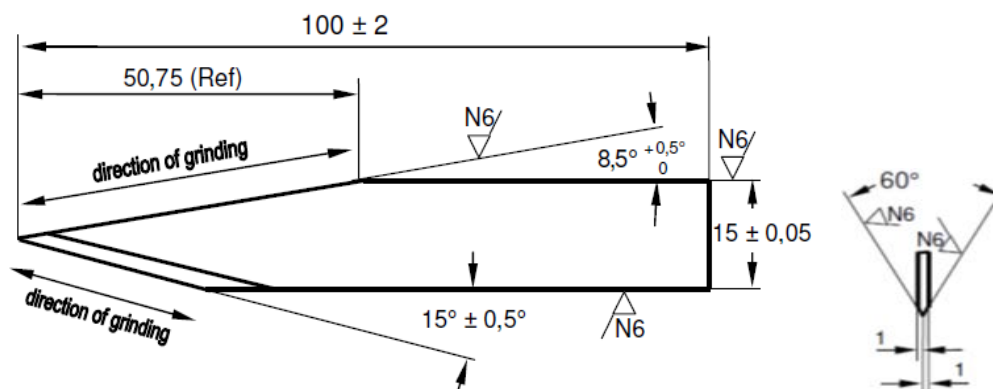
Geometry of the test blade P1/B (dimensions in mm) [52]
